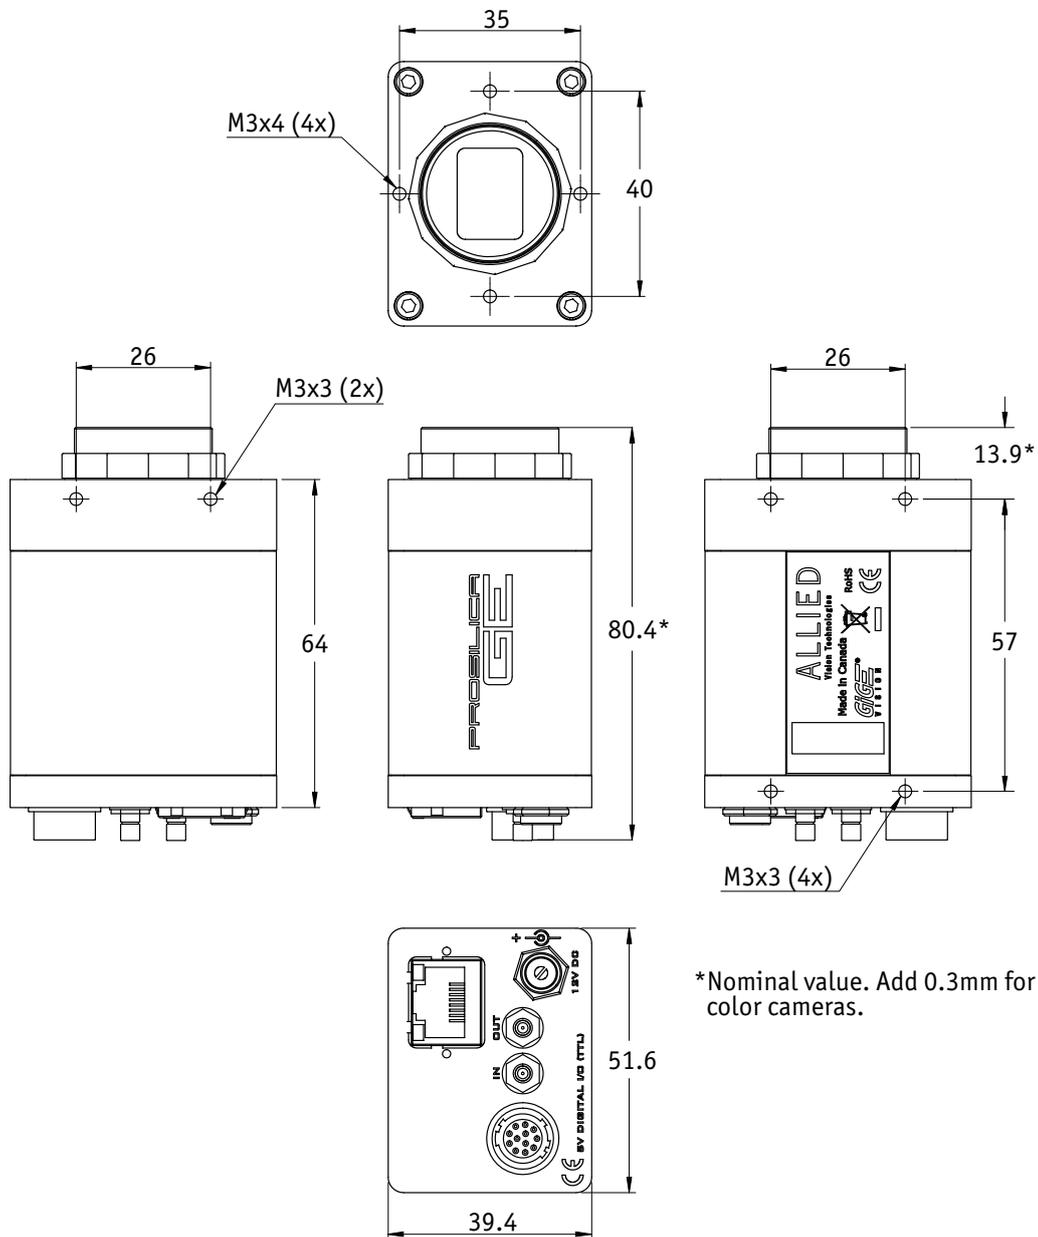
Prosilica GE680 adjustable C-Mount mechanical dimensions
